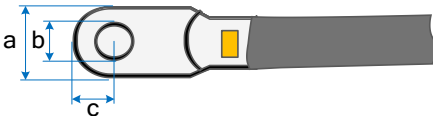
Dimensions of Terminal (Single-hole terminal)
